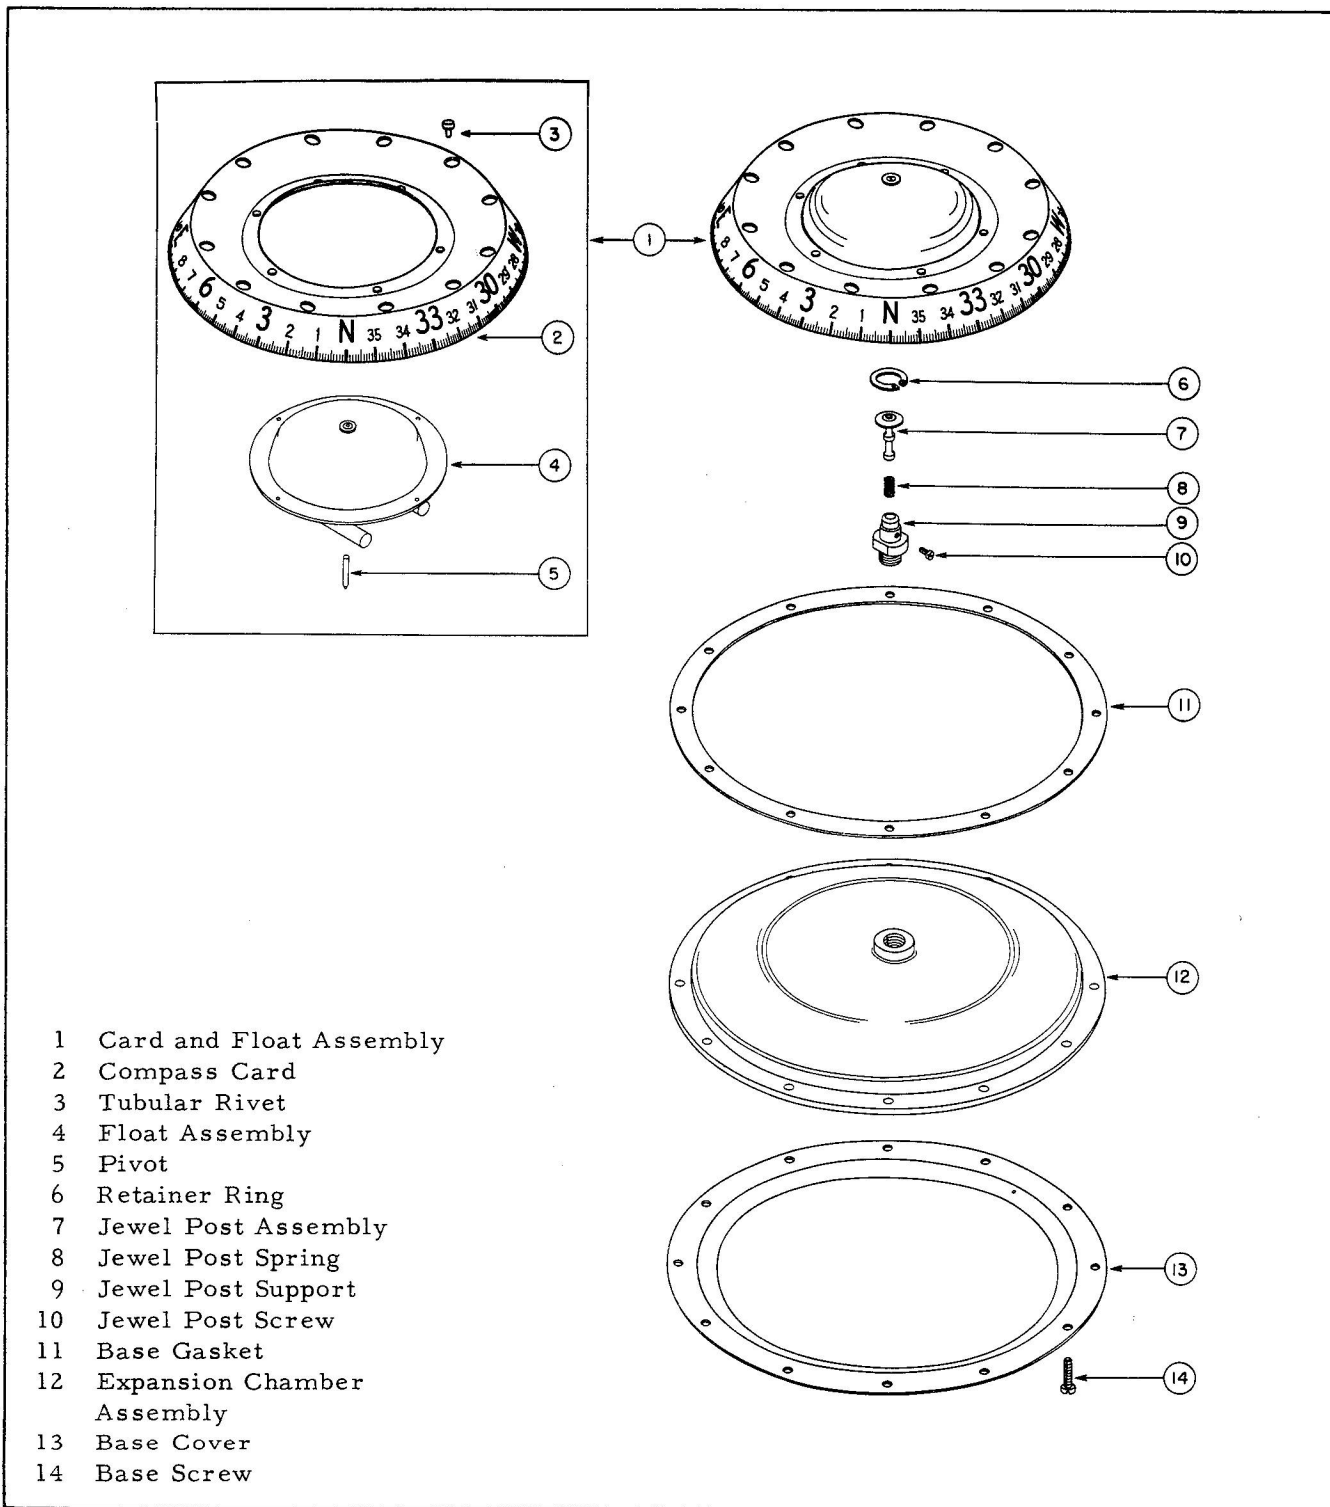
Exploded View - Compass - Card and Float Assembly and Attaching Parts - Type B-17 (Pioneer Types 1813-1-A and 1813-1-B)
